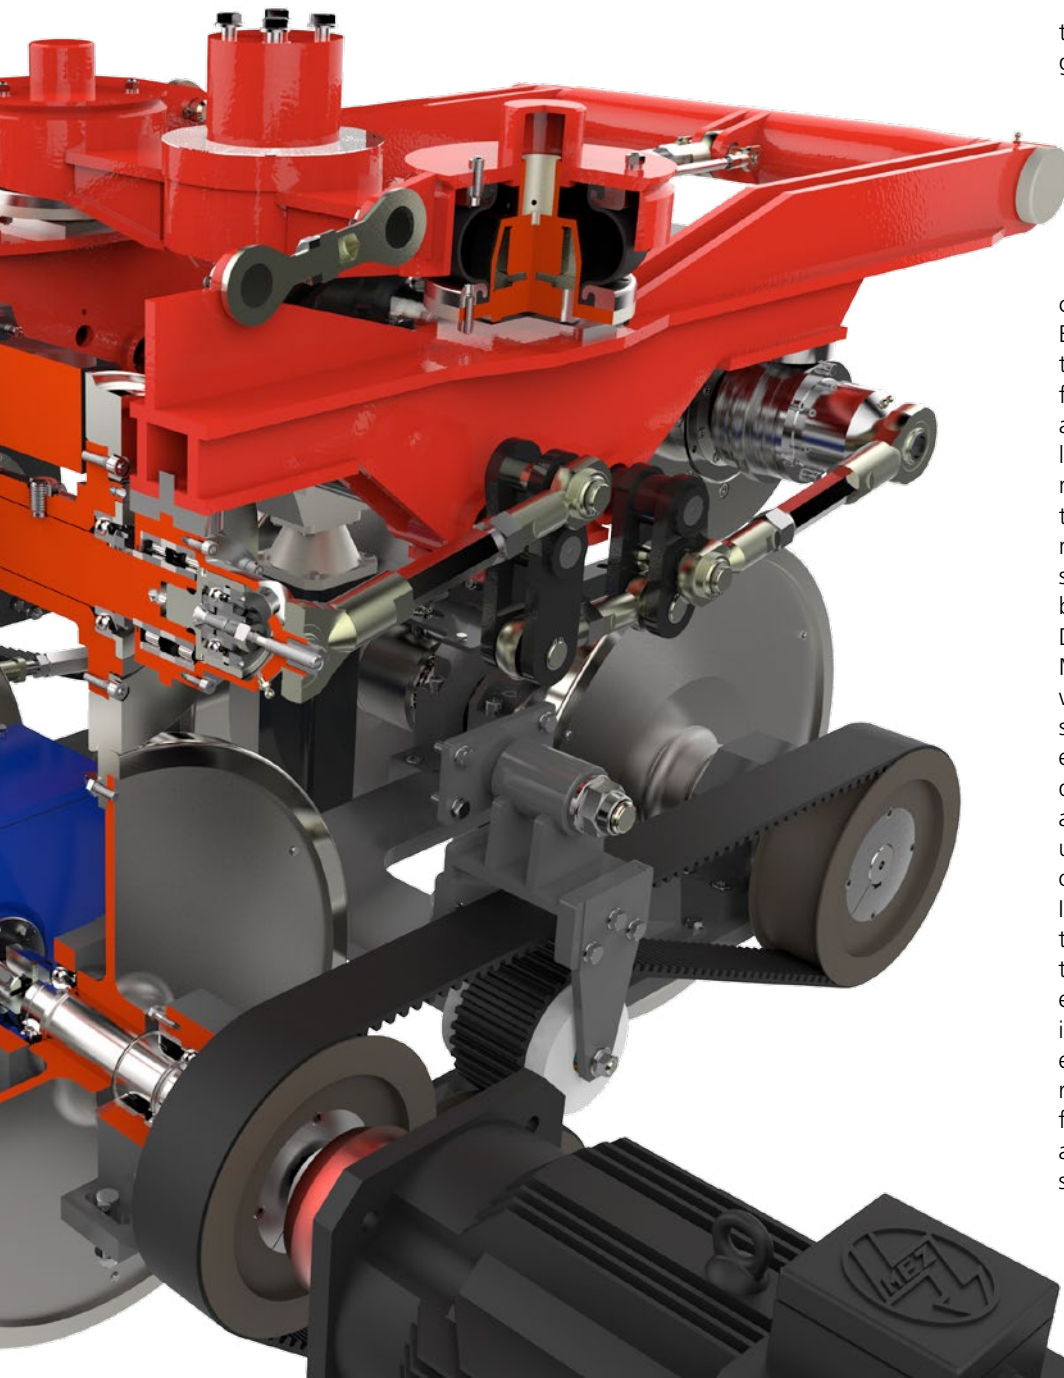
Single actuator configuration of the wheelset steering mechanism
